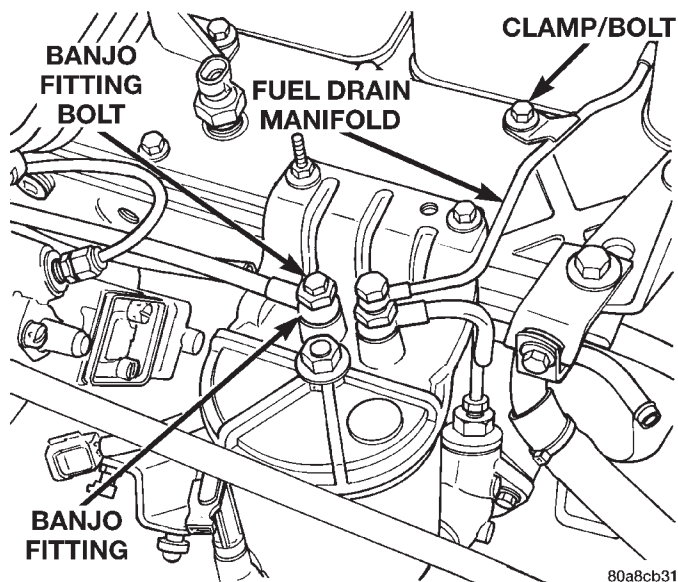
Fuel Drain Manifold and Fuel Filter/Water Separator
